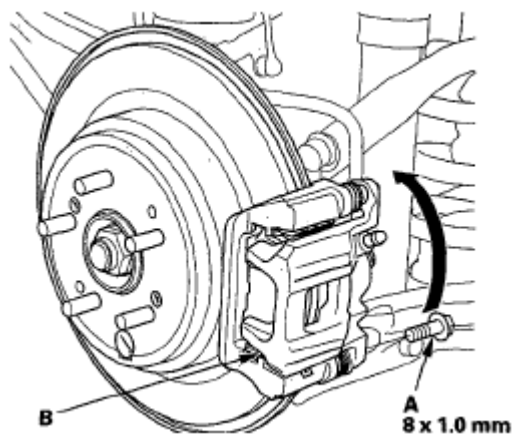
Identifying Thickness Of Inner Pad And Outer Pad
